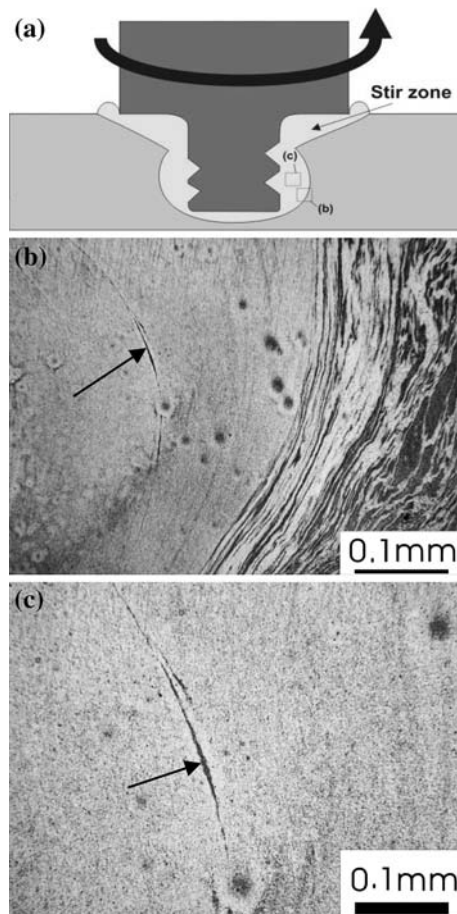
(a) Schematic of friction stir spot weld and tool during spot welding, showing locations of local melted films observed in the stir zone. (b) and (c) Optical micrographs showing local melted films formed in the stir zone of a quenched AZ91 spot weld made using a plunge rate of 2.5 mm/s and a dwell time of 0.25 s (see arrows)
